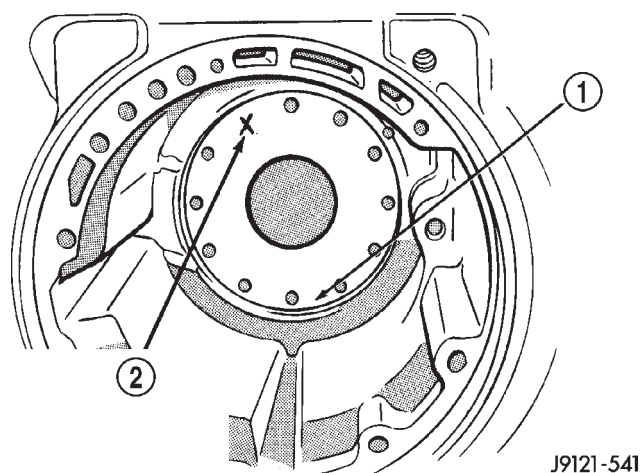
Location Of Blank Area In Clutch Cam Bolt Circle
